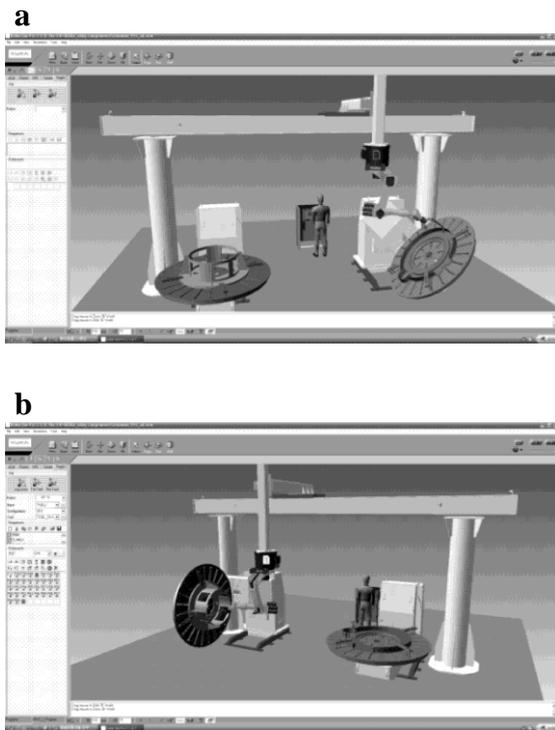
Welding simulation of radar pedestal of a) the lower part and b) the upper part
